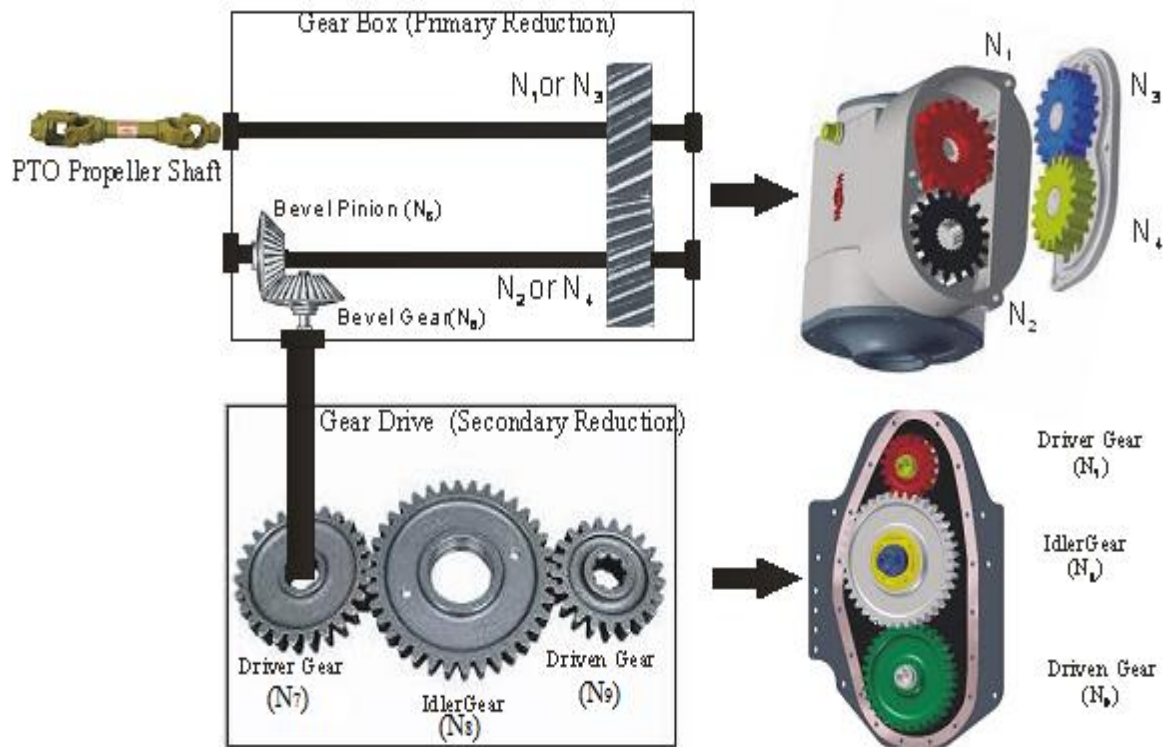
Line diagram of gear box assembly of Tractor Mounted Rotavator
